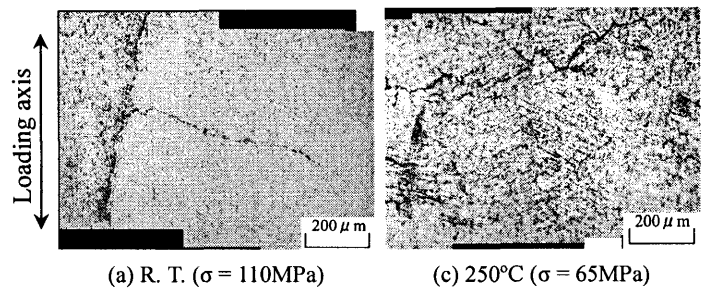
Cracks observed at the surface of fatigue-failed specimens.
